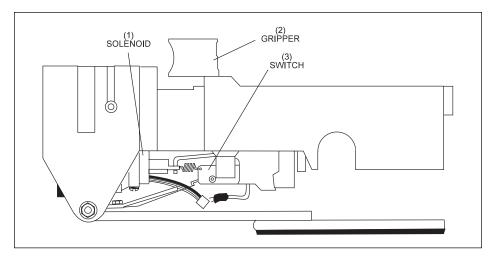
Pin Holder Horizontal - Up for Loading Pins.
